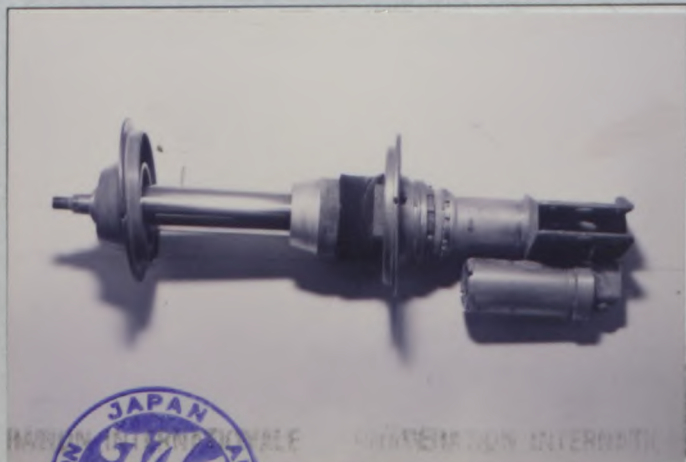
HEAVY DUTY FRONT DAMPER UNIT
